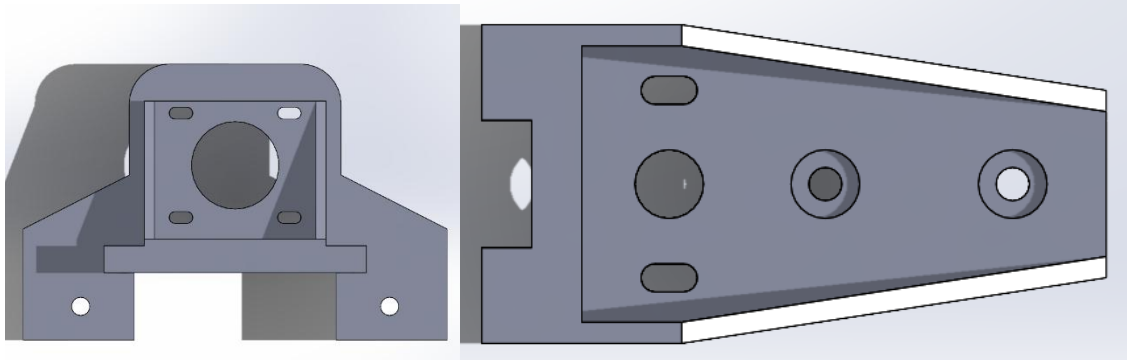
z-axis assembly top view Figure 8: lead screw bracket top view
